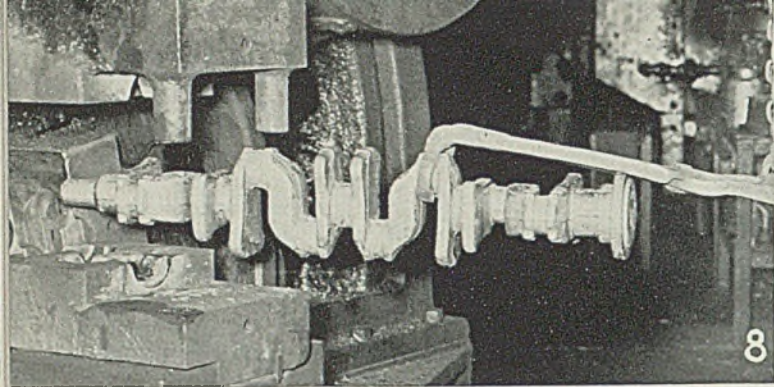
Crankshaft is forged with all throws in the same plane. Then forging is clamped between these two sets of dies and twisted 90 degrees between throws two and three, thus placing cranks one and two in position. Then forging is again inserted in machine and twisted between throws seven and eight. This places throws one and two, seven and eight in a plane at right angles to throws three, four, five and six. One of the three main bearings is located at each end, the third in the center of the piece. Twisting greatly simplifies the forging problem since it permits all throws to be forged in one plane. Compare this with the exceptionally complicated forging dies and procedure that would be necessary were the crankshaft forged with all cranks or throws in final position
